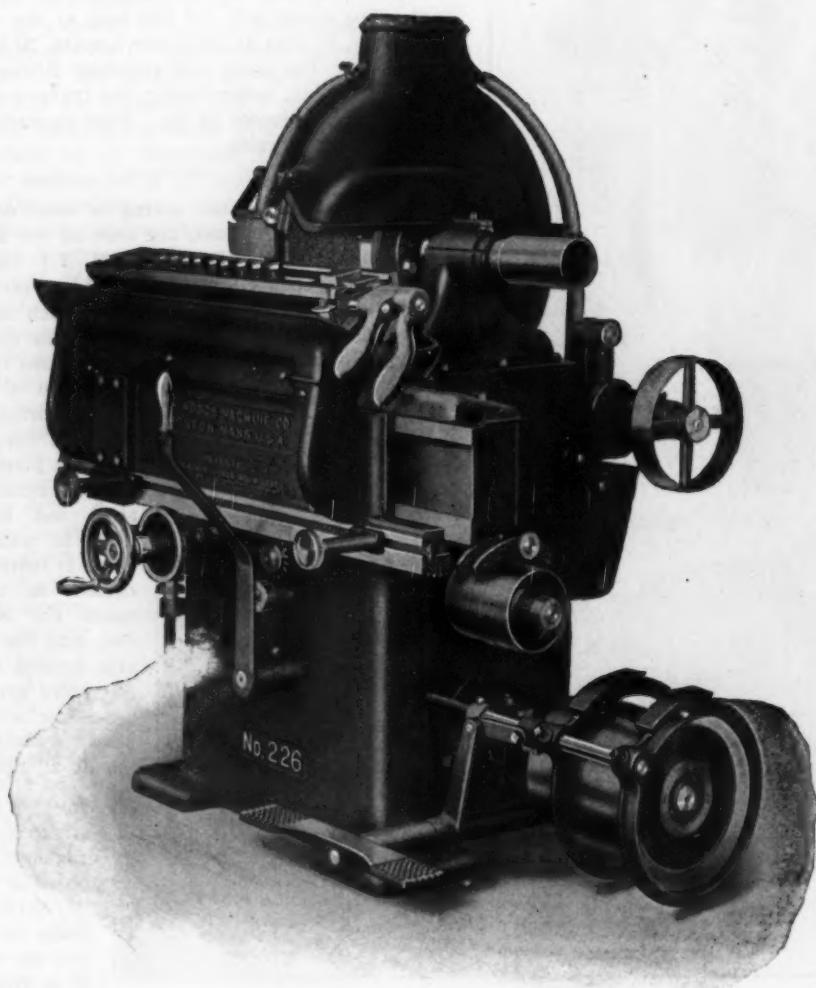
The No. 226 New Automatic Knife Grinder Built by the S. A. Woods Machine Company, Boston, Mass.
